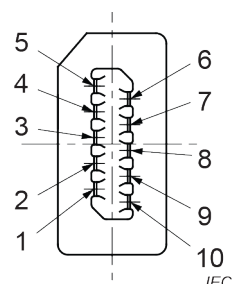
Fixed connector pin assignment for Type B, front view of connector
